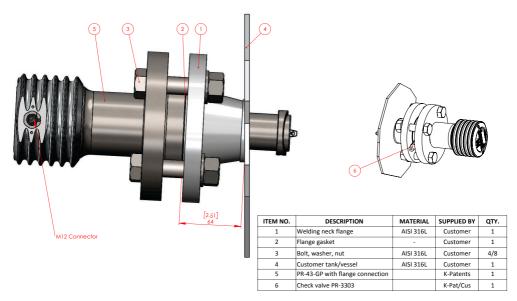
Mounting PR-43-GP to a tank or vessel
